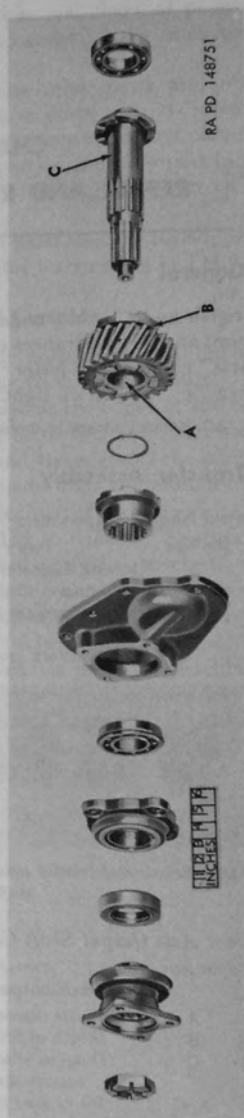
Repair and rebuild standard points of measurement for transfer front axle output shaft components.
